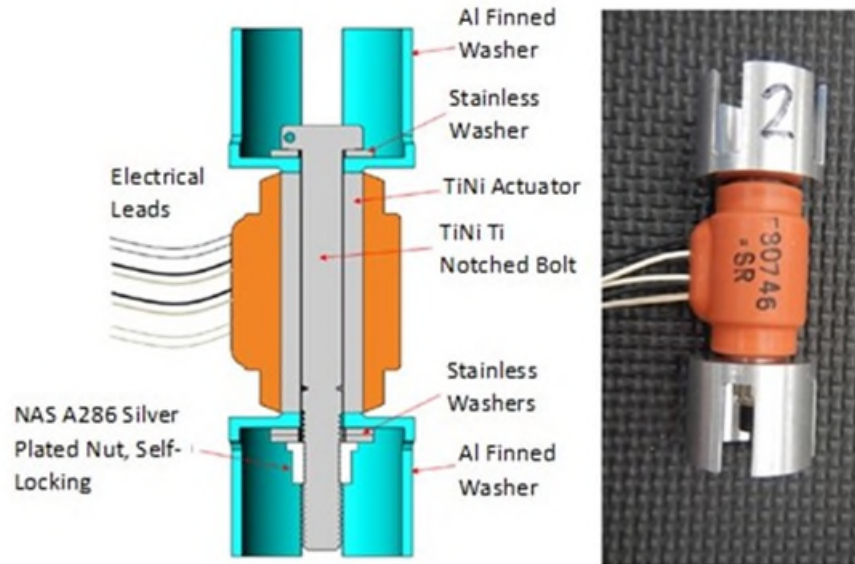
Cross-Section of Frangibolt Test Assembly (Left) and Sample Photograph (Right)
